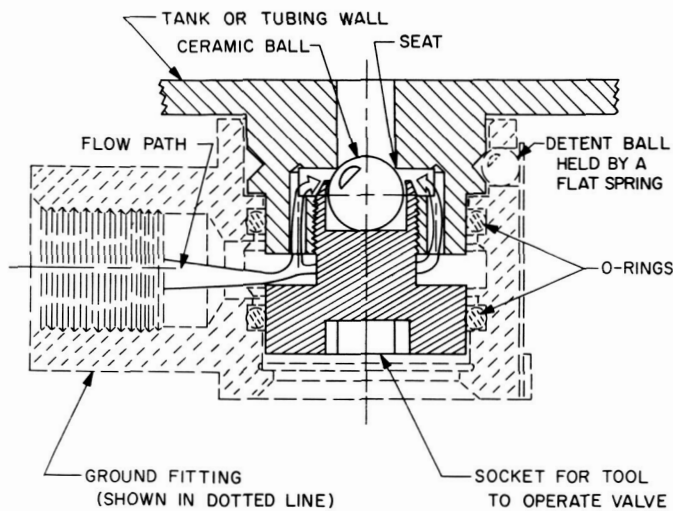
Ball fill-valve cross section (type with flow passage in boss)
